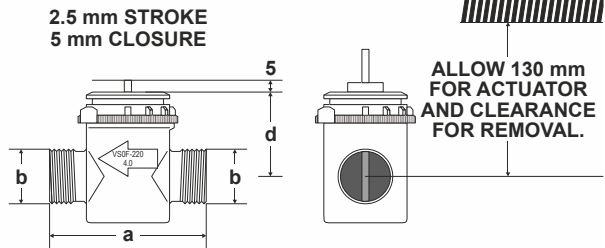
Two-way valves with snap-on, dimensions (mm)
